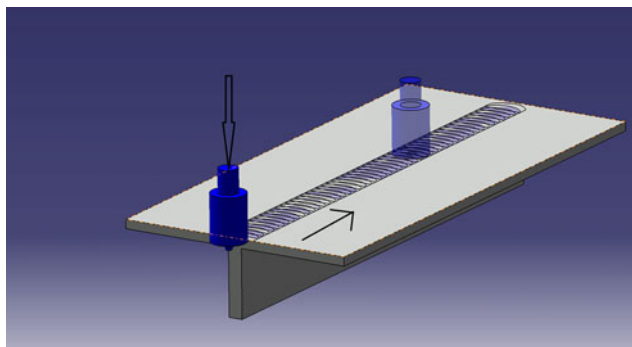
Welding configuration: the two arrows indicate plunging direction and welding direction
